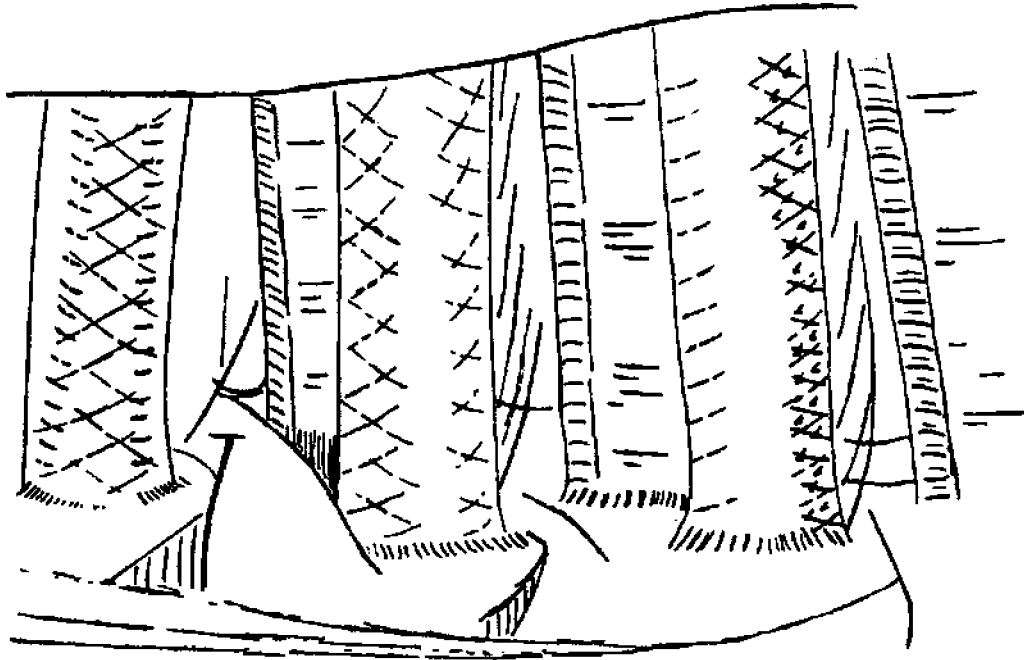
Drawing of Borescope Photograph of First Stage High Pressure Nozzle Diaphragm on LM 2500 Engine.
